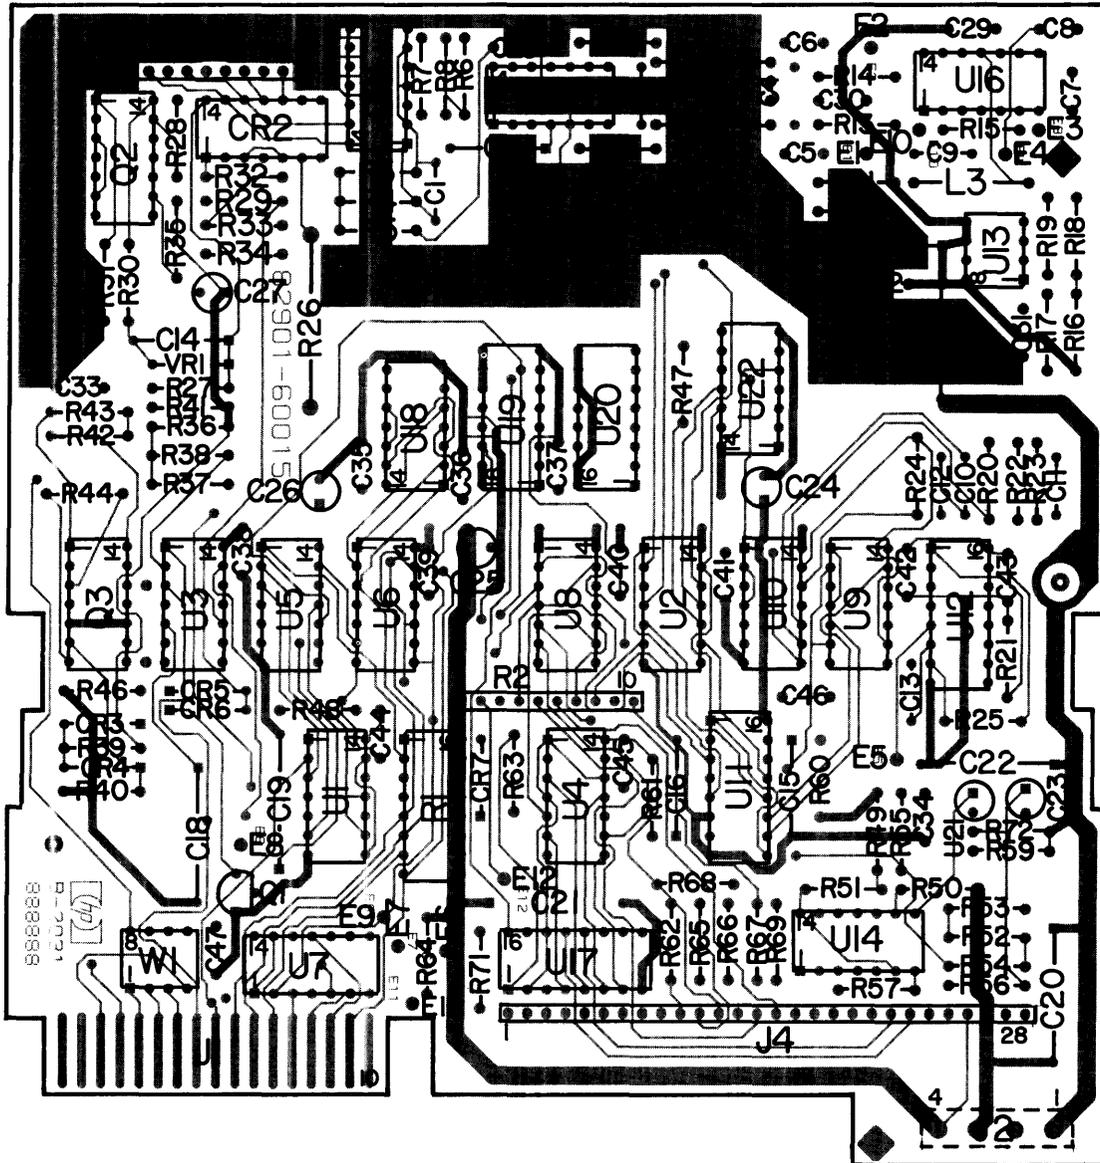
Drive Board P/N 82901-60015 Component Locator
